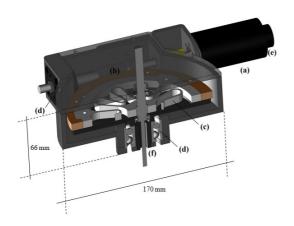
Cross section of the rotary SEA showing drivetrain components
